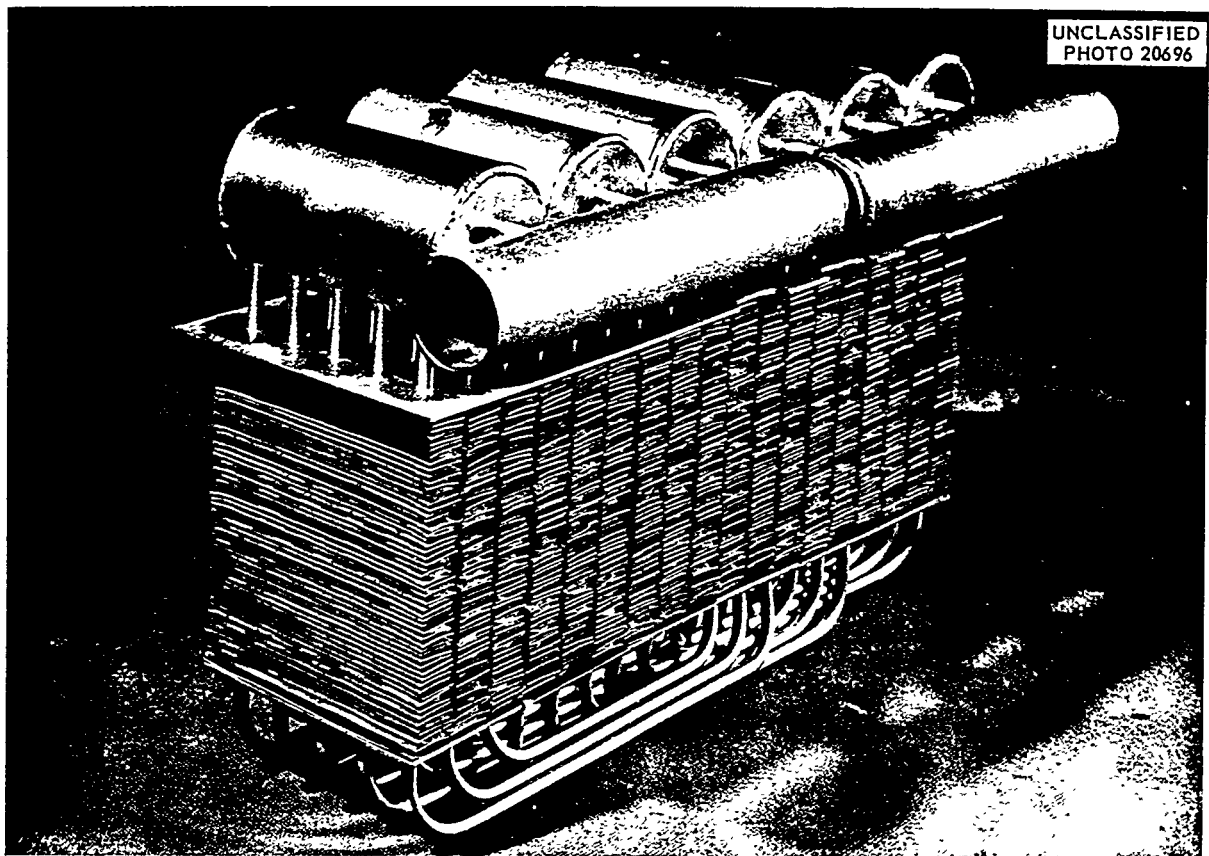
Sodium-to-Air Radiator Fabricated by the Combined Welding and Brazing Technique.
